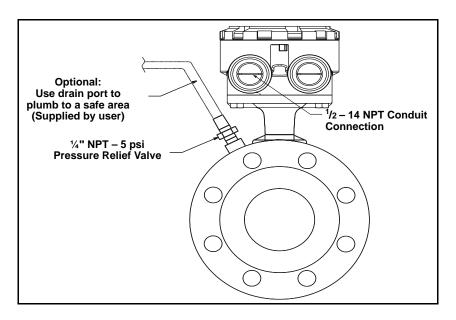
Standard Housing Configuration — Sealed Welded Housing (Option Code W0)
